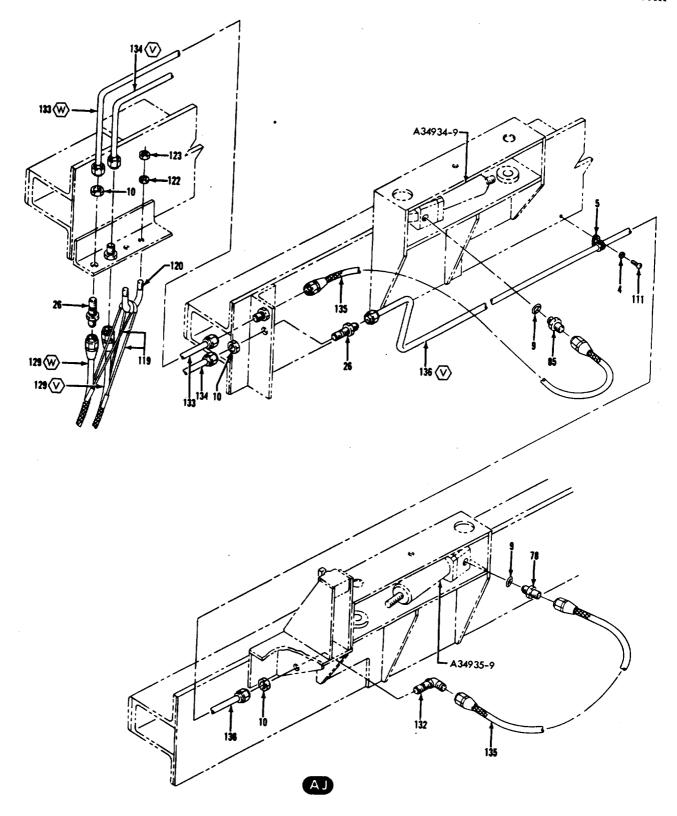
Tubing Installation (Sheet 12 of 17)
